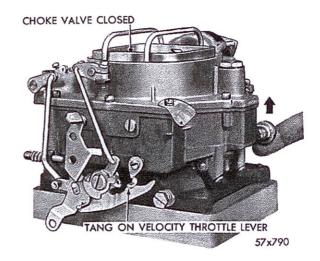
Checking Velocity Valve Lockout Adjustment (Rear Carburetor)
